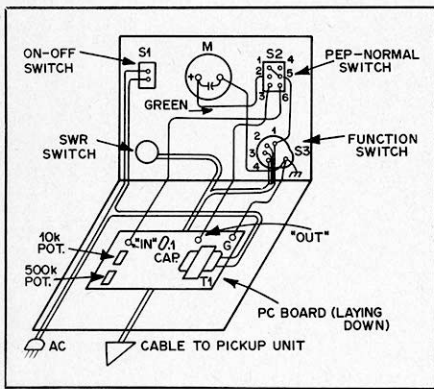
Guide for suggested installation of the amplifier/rectifier pc board into the HM-102.
